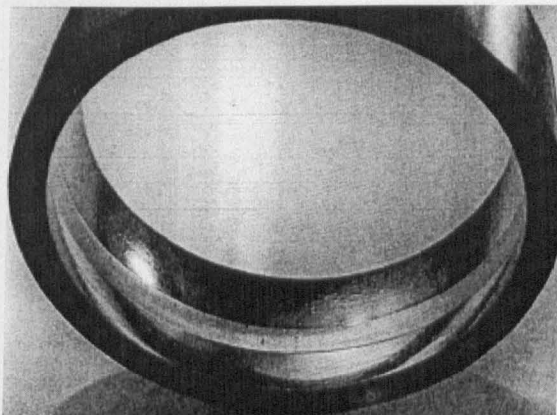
Outer ring of a roller bearing worn by inadequate lubrication (SKF, 1994)
